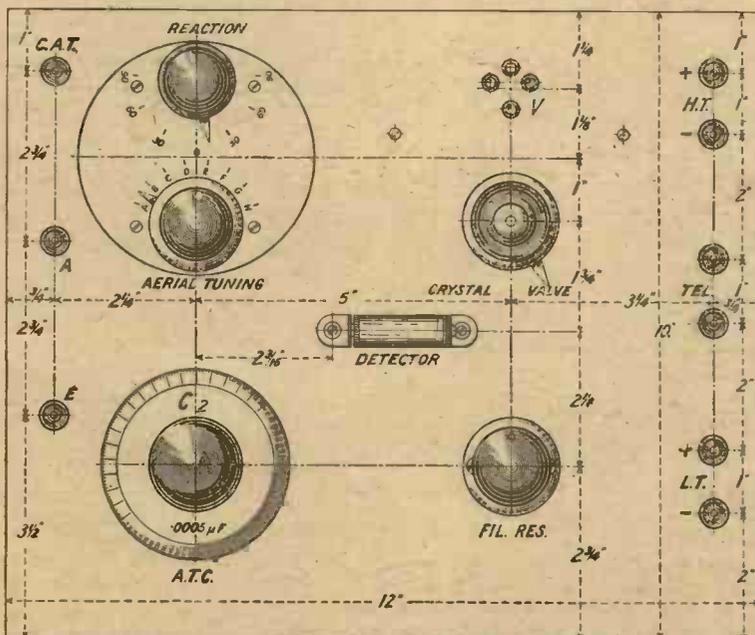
The panel is to be drilled as this drawing shows. Full-size blueprint No. C1017A may be obtained, price 1/6 post free.
